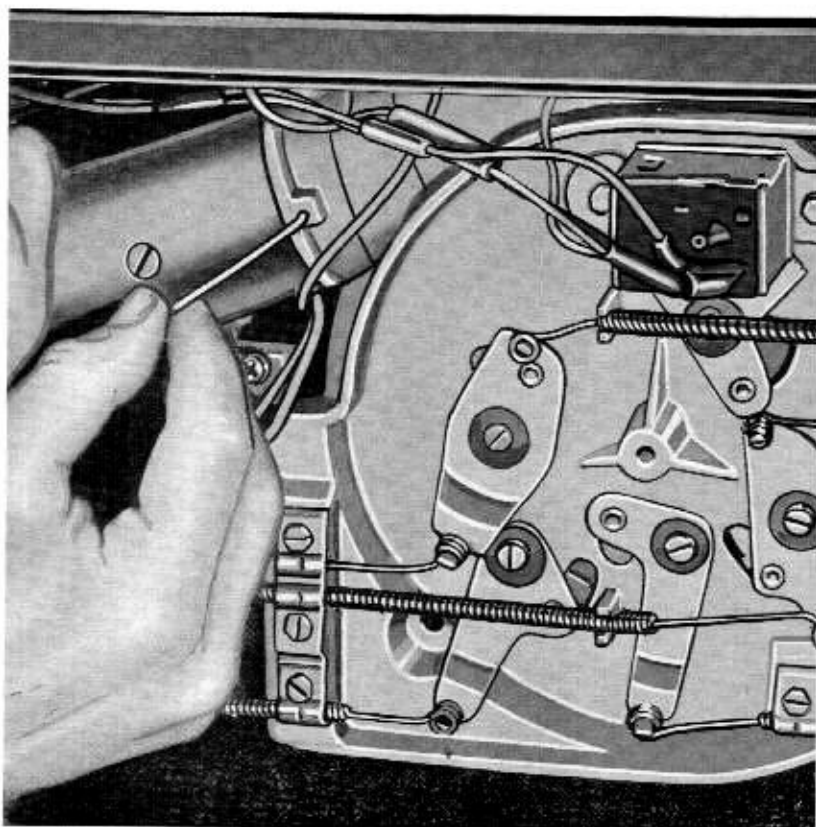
Removing Servo Motor Set Screw—(61LT-8828)
